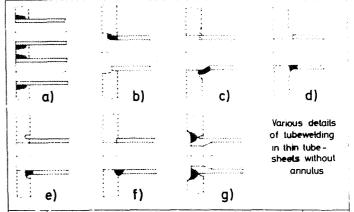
Various details of tube welding in thin tube sheets without annulus.
